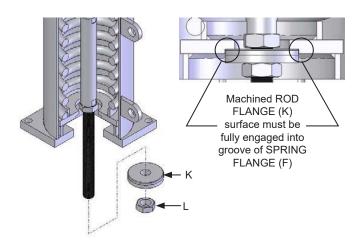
Threading the Rod Flange onto the Stud Extension 9. Lock ROD FLANGE (K) down by threading 3RD JAM NUT (L) onto STUD EXTENSION (D). Fully tighten 3RD JAM NUT (L) top face against bottom face of ROD FLANGE (K).
